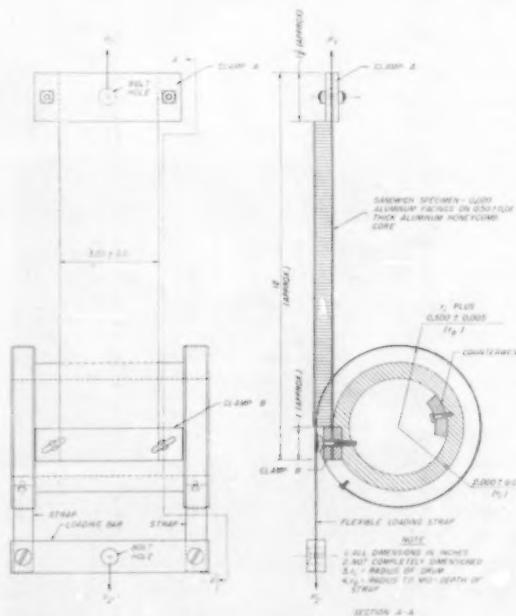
Apparatus and test specimen for making peel tests on sandwich constructions
